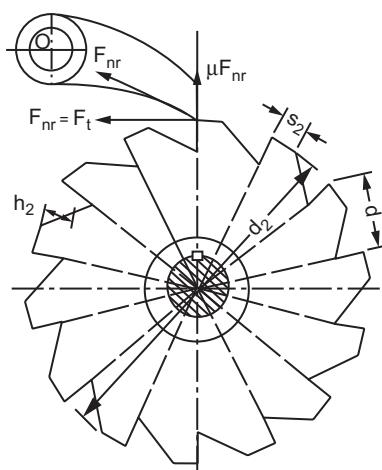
Ratchet wheel with radial tooth flanks and pawl.
